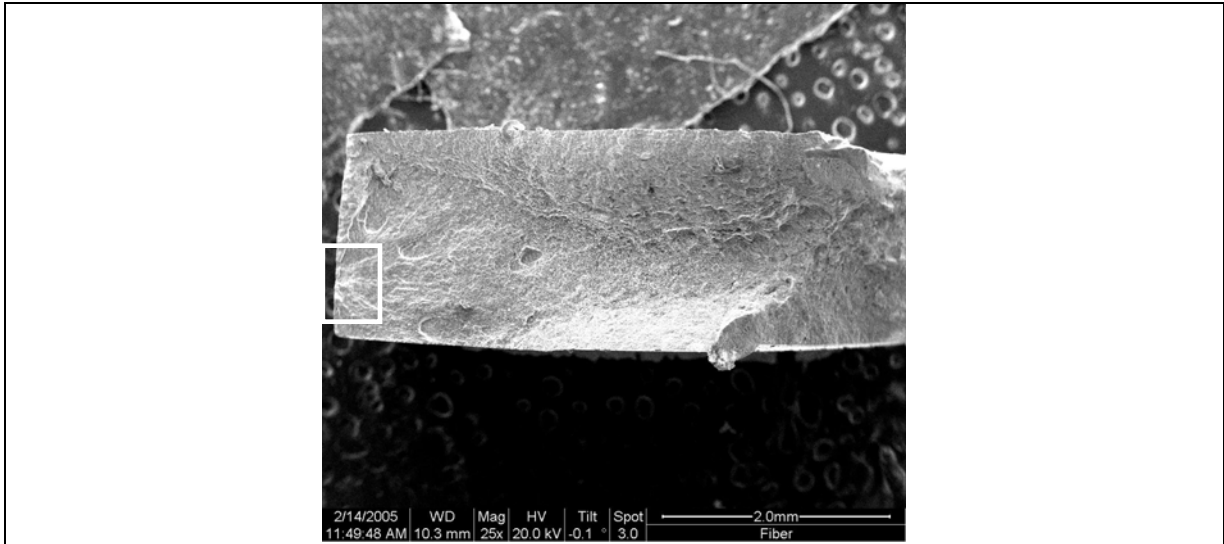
Specimen Ti-09, overall view of fracture surface
